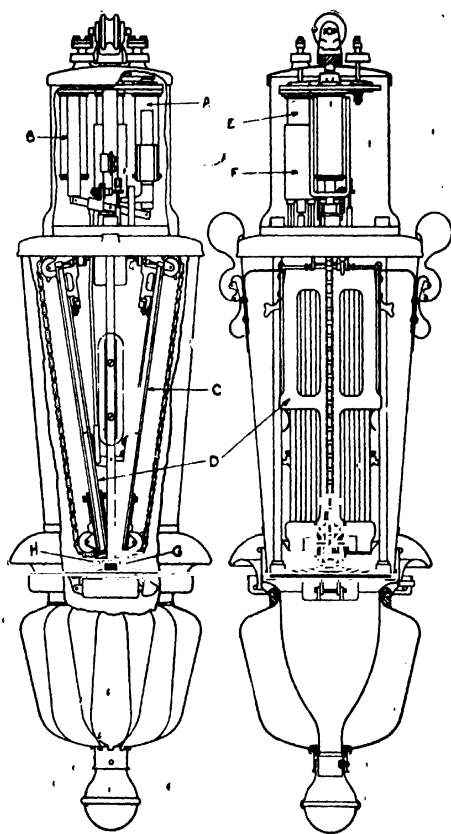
SECTIONAL VIEWS OF MAGAZINE FLAME ARC LAMP
